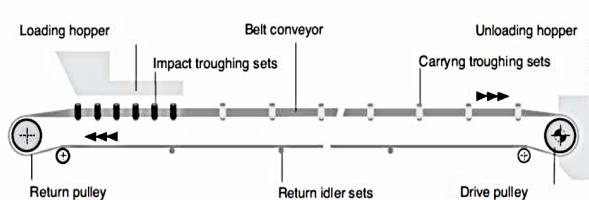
Basic Drawing of a Belt Conveyor [12]
